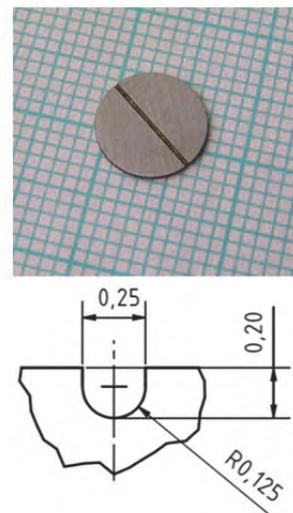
Disc test specimen with “U” notch in the axis of disc plane
